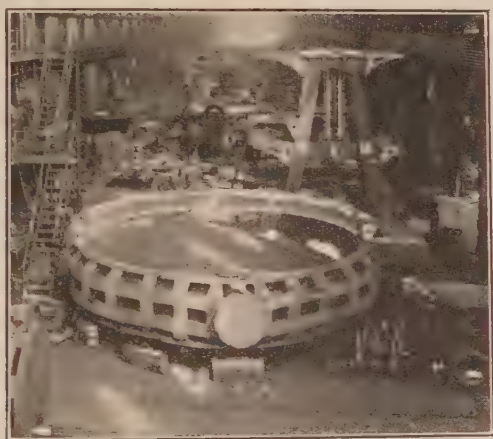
BUTTERFLY VALVE. ASSEMBLY OF HOUSING WICKET AND OPERATING SHAFT
